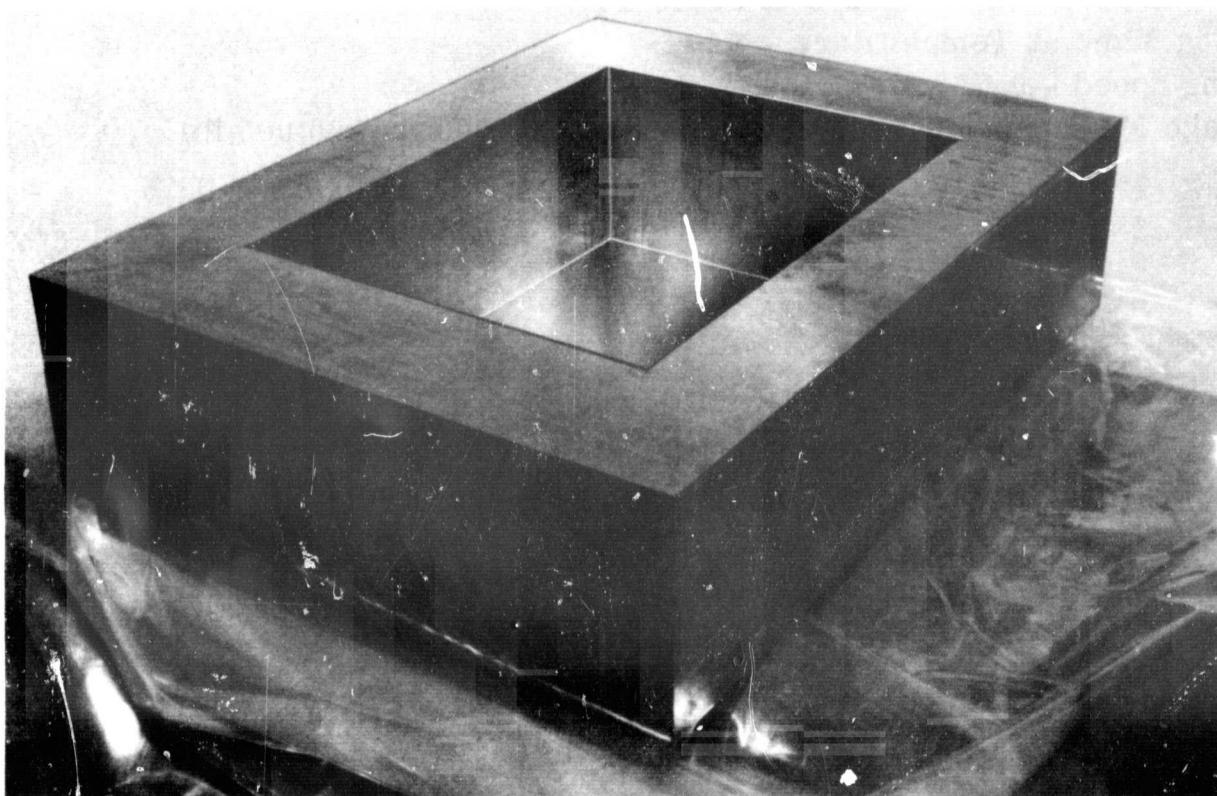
ASSEMBLY OF PACK, STEP 1
